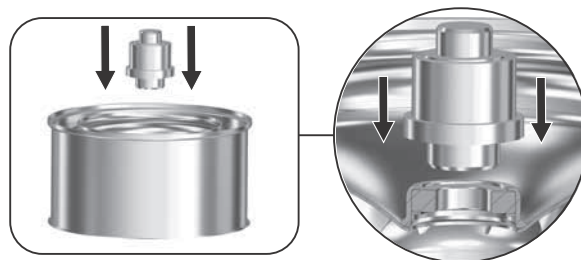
Pressing out the bush (47c) and retaining ring (47d) with service tool K
